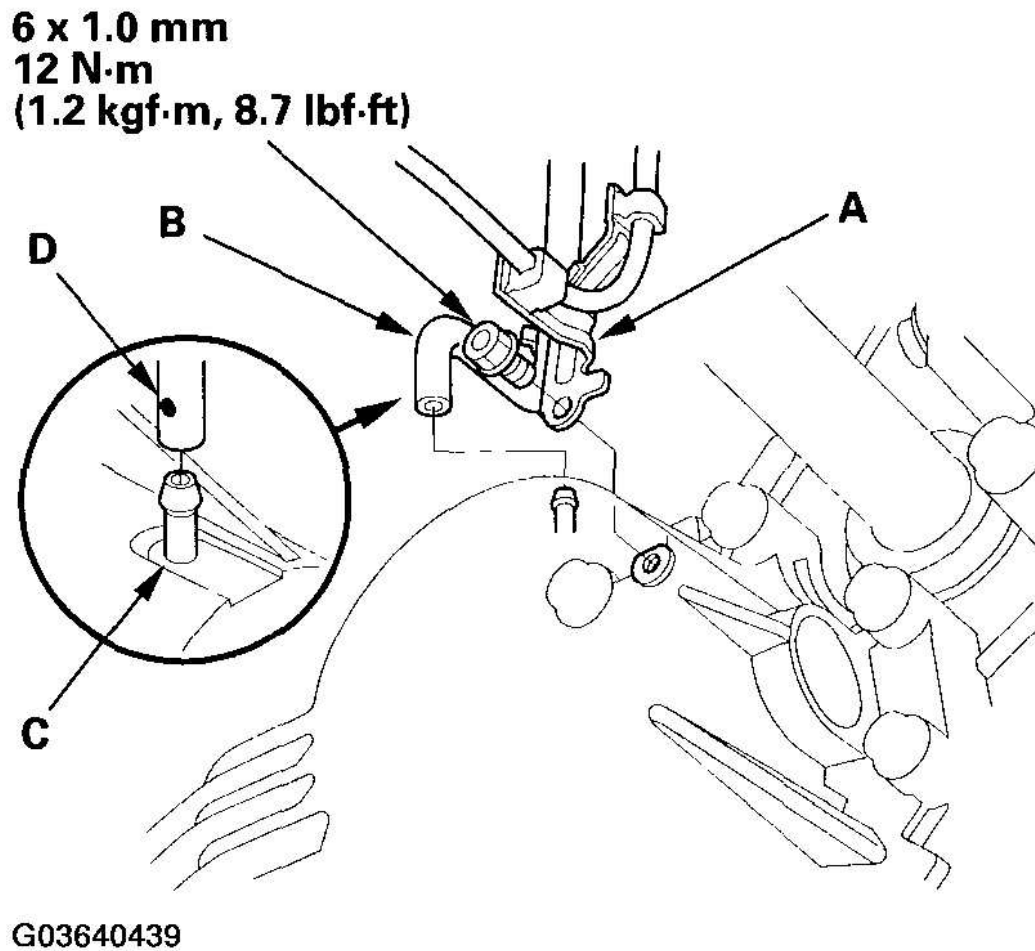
Installing Breather Tube Over Breather Pipe With Dot On Tube Facing Out
